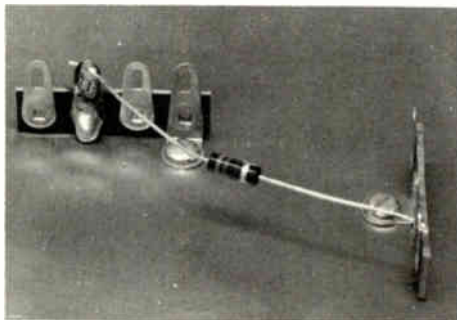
A terminal shorted to the chassis by excessive solder.
